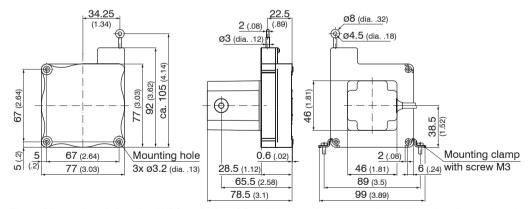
Dimensional drawing WPS-...-MK77-CR, with potentiometer and radial cable, dimensions in mm (inches), not to scale
